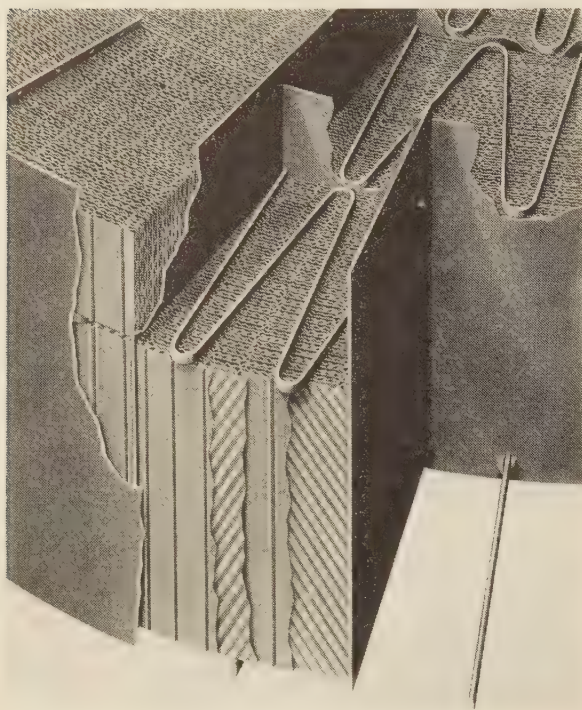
ENLARGED CUTAWAY DETAIL OF NOTCHED UNDULATED TYPE HEATING SURFACE
